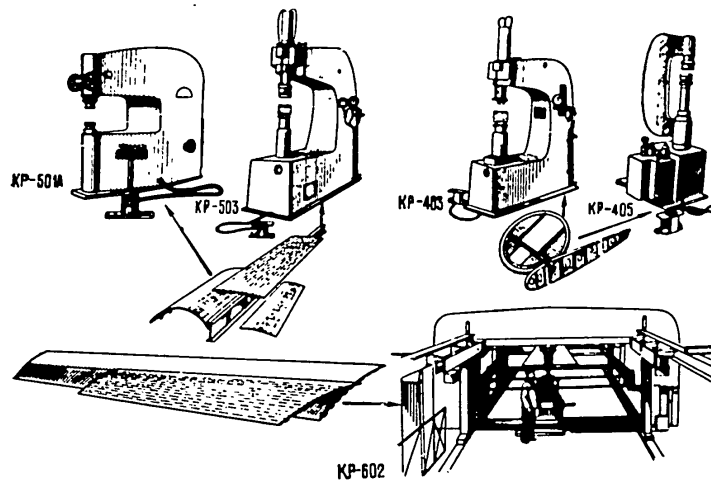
Press Equipment for Group Riveting of Various Assembly Units and Panels
